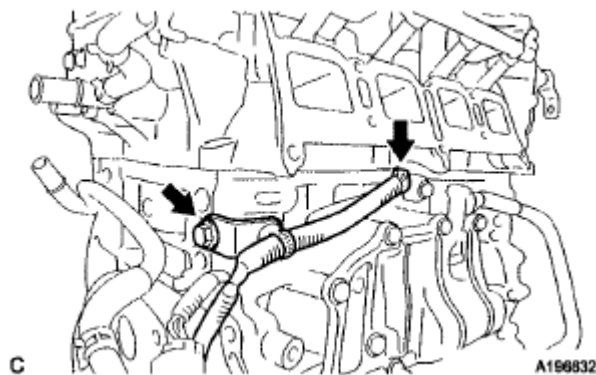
Locating Knock Control Sensor Wire And Bolt
